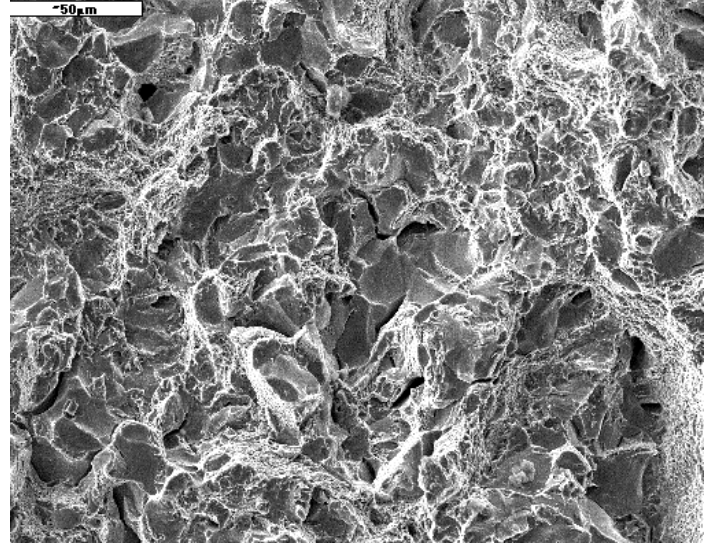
Fractured surface of the 40HMNA steel, SENB specimen.
